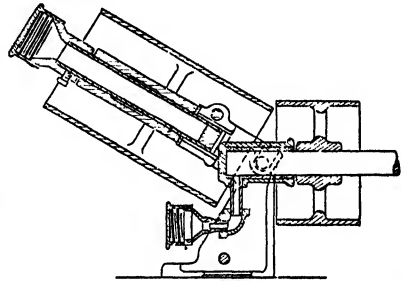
Three-pulley Troughing Idler with Center Pulley Tight on Shaft and Corner of Inclined Pulley Depressed.
